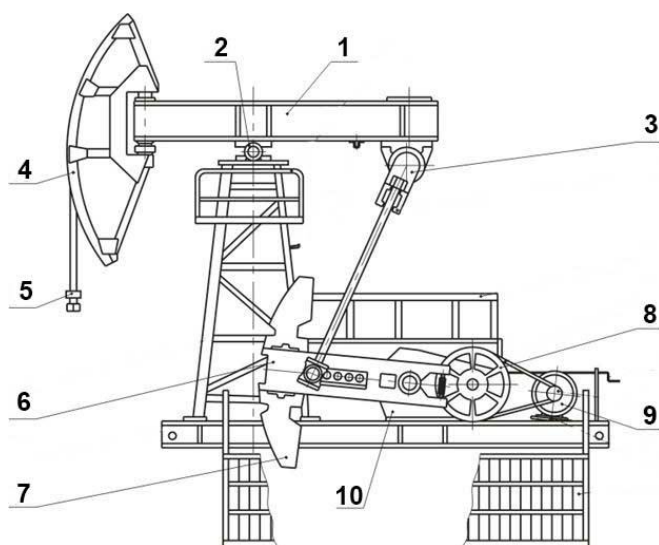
Overall scheme of sucker-rod pumping unit SRPD8-3-5500 design.
